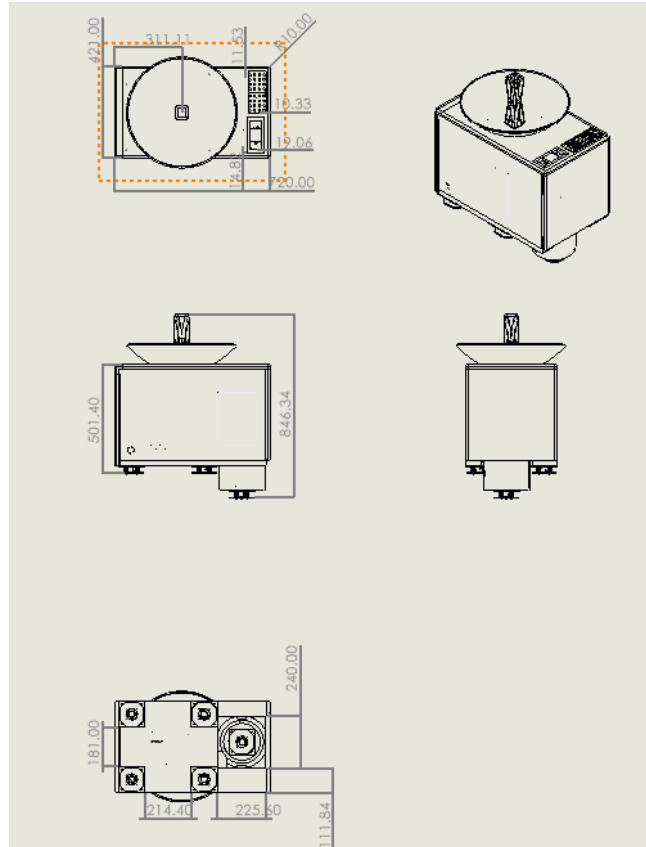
A drawing of a complete assembled model of the orbiter defined in millimeters.
